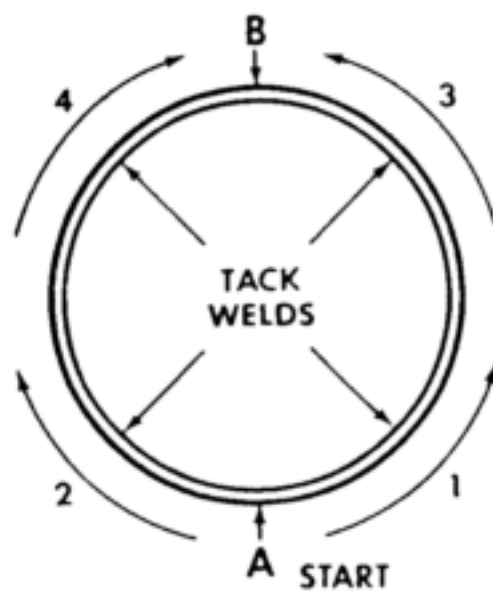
Diagram of horizontal pipe weld with uphand method.
